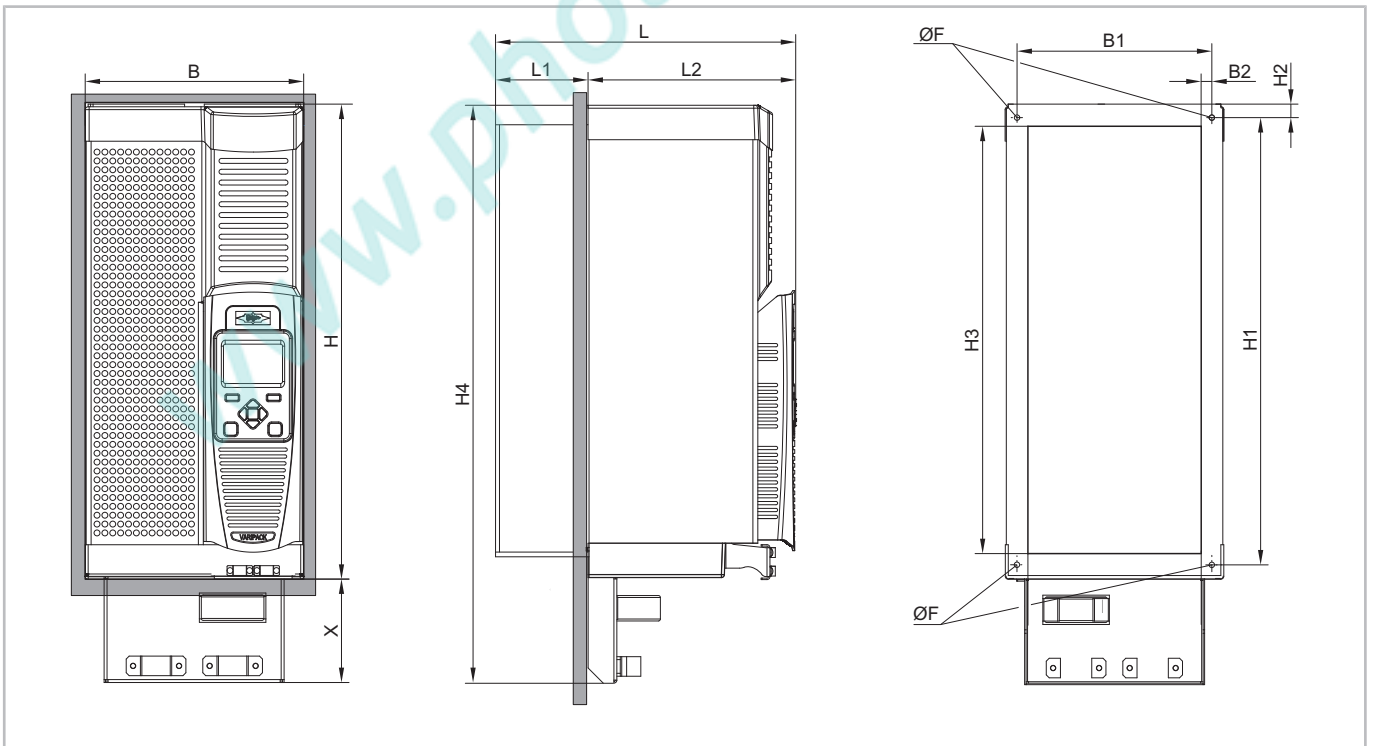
Dimensional drawing FEU+16 .. FHU+73 for through-switch cabinet mounting (with optional control panel)
